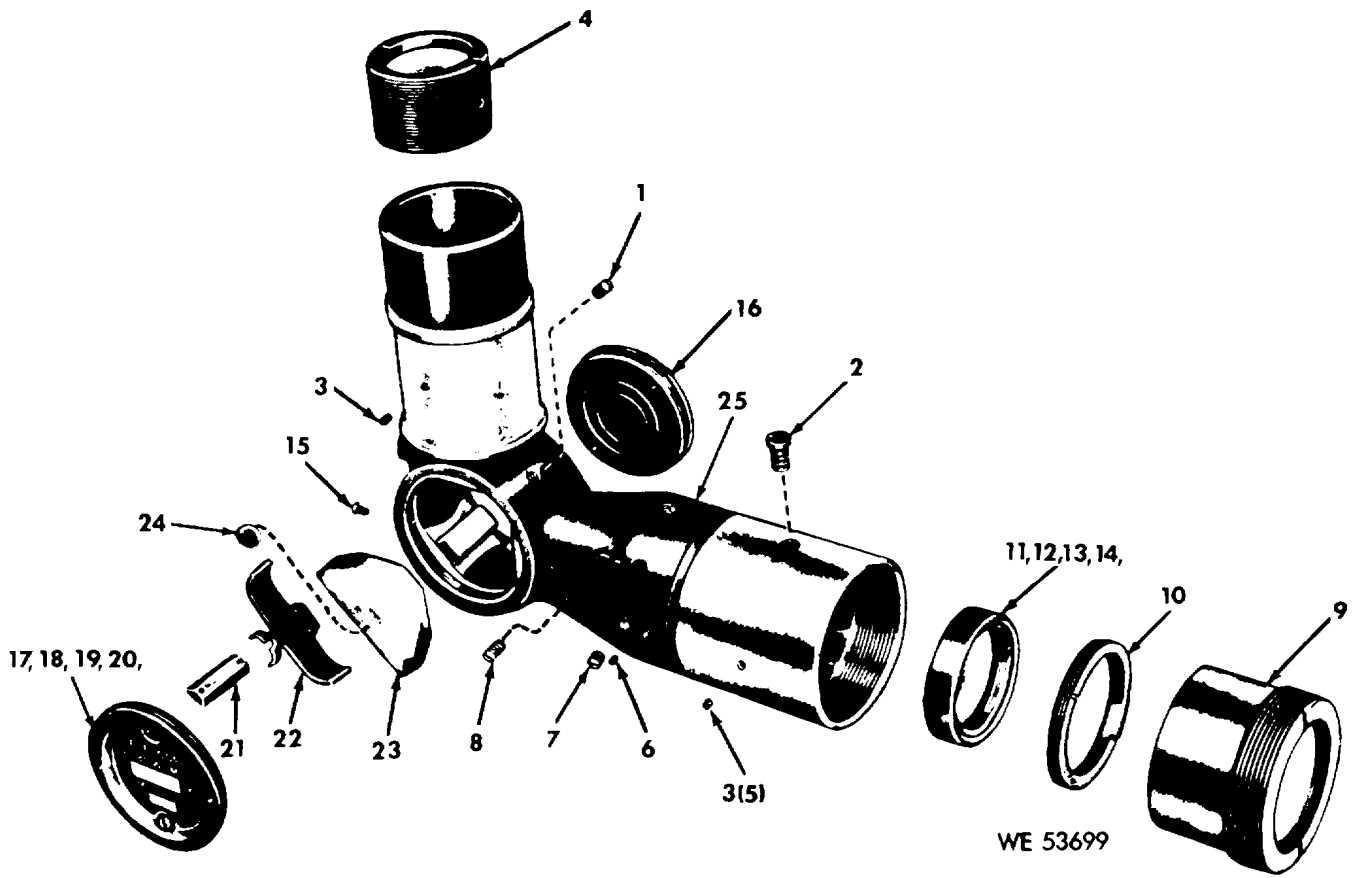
Elbow telescope M116A1D, M116, M116C, and M116F-partial exploded view.
